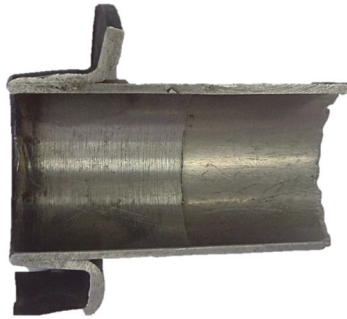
A fragment of the heat exchanger at the junction of its elements by explosion welding
